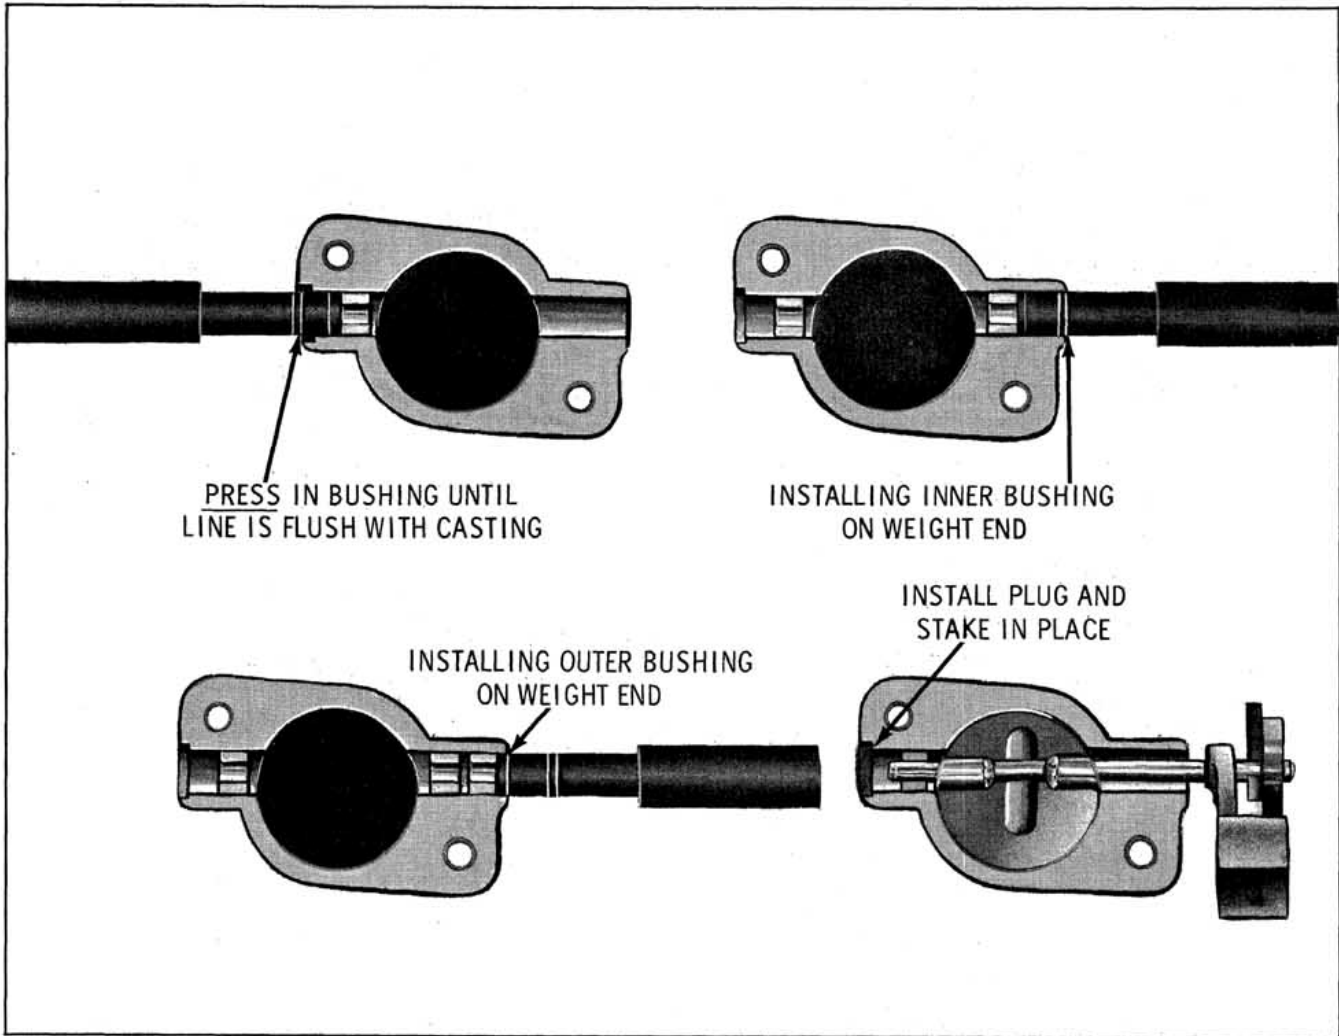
Exhaust Manifold Heat Valve Replacement
